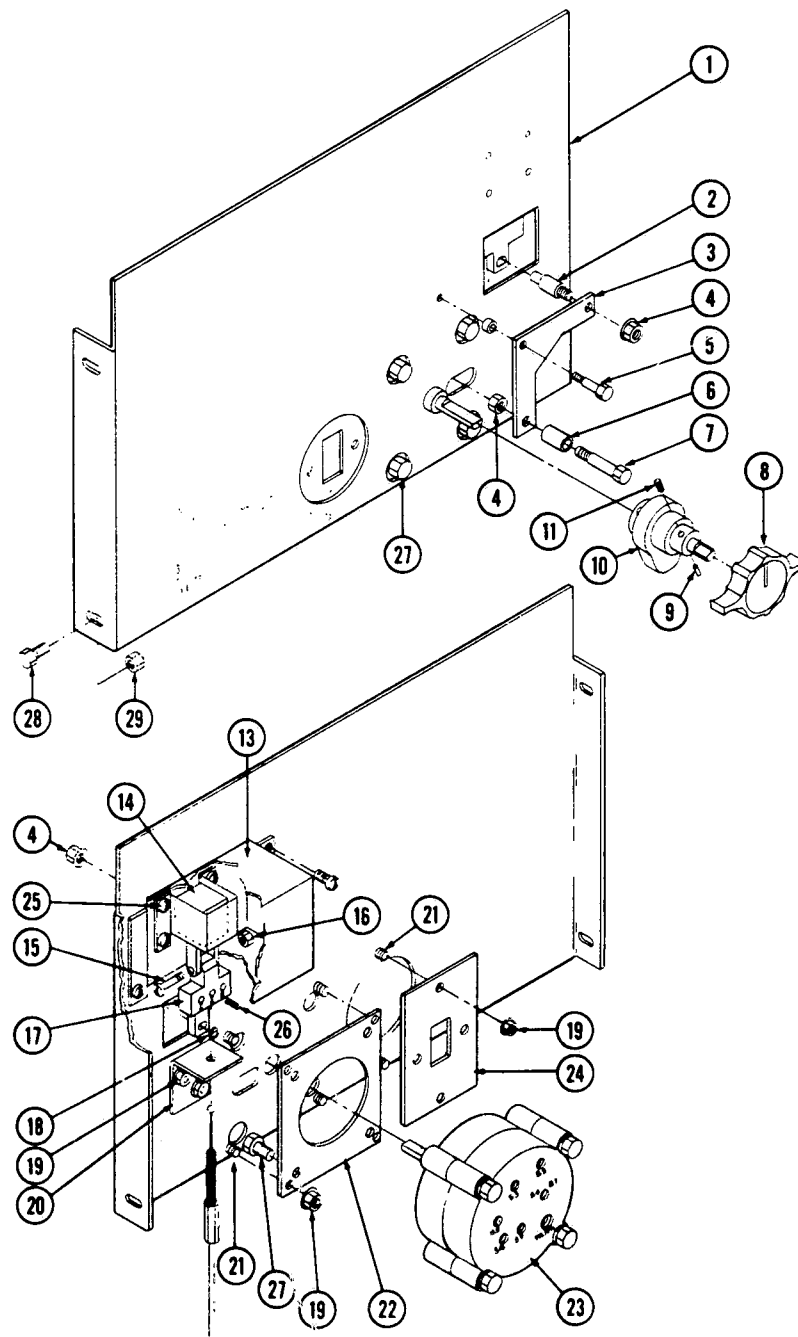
MOUNTING PANEL ASSEMBLY - Multi-port Valve
